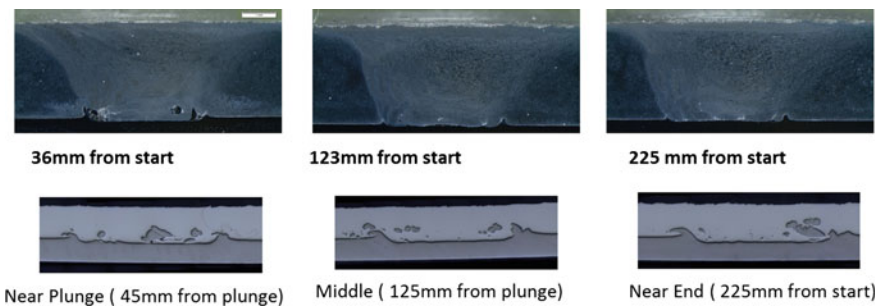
Transverse weld cross section revealing the FSS joint between mild steel and AA6022 aluminum (*top*) and cast aluminum and steel (*bottom*). The cross sections were obtained from near the start, middle, and end of each 280 mm long joint
